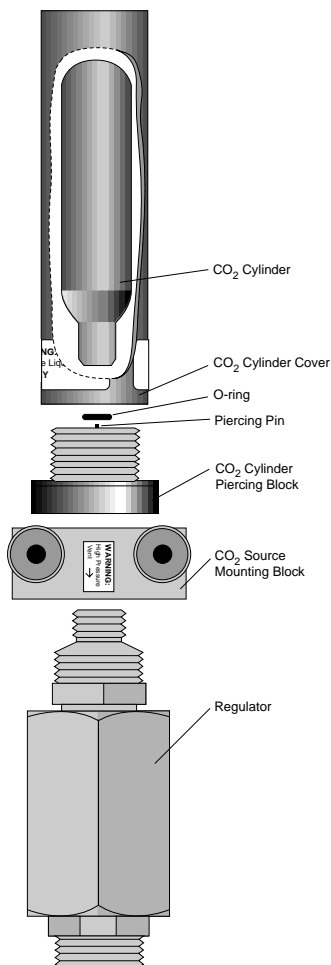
Exploded view of external CO<sub>2</sub> source assembly.
